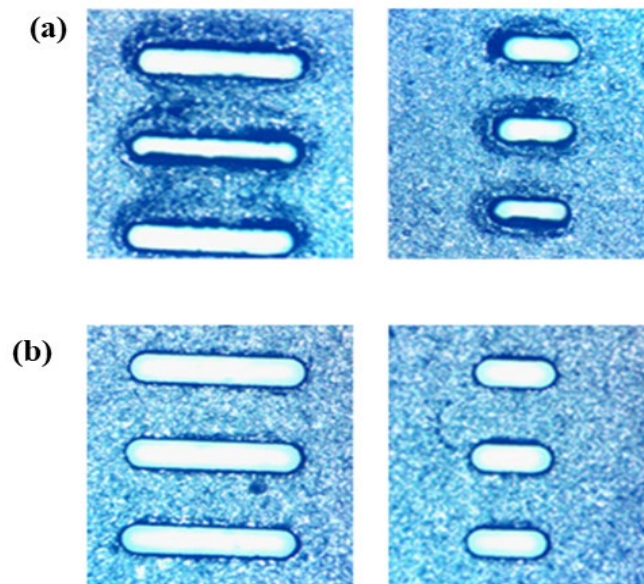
Top view of (a) initial slots in the core showing burnt edges and flaking of magnetic particles, due to thick core, high laser power and low speed (b) slots in core using optimized laser drilling process
